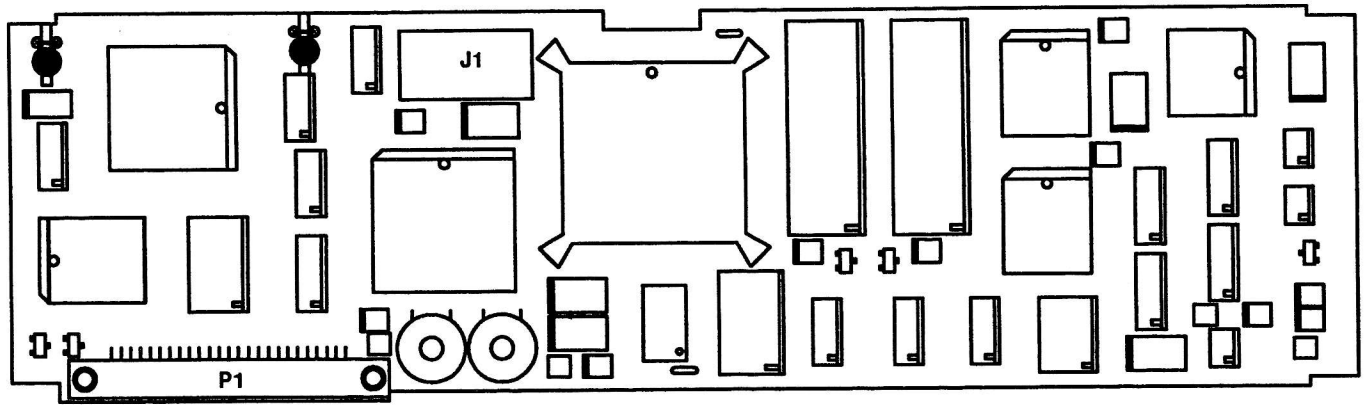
A1A1 Interface PWB Assembly Component Location Diagram
